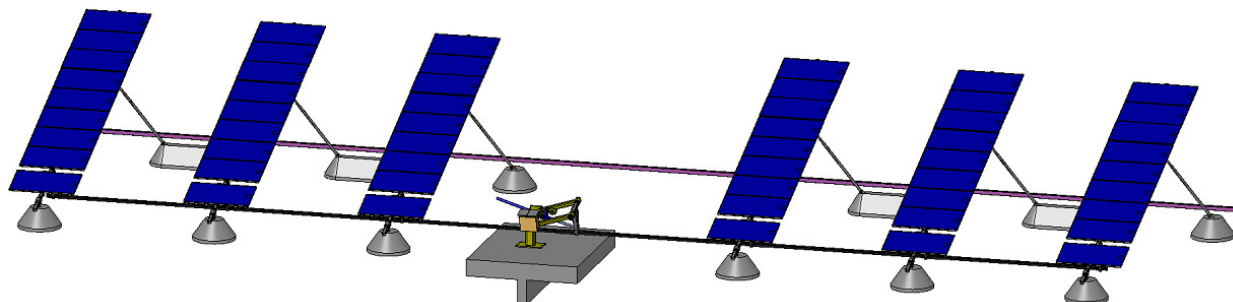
Model of T20 v2 tracker showing new drive unit location and module mounting design
